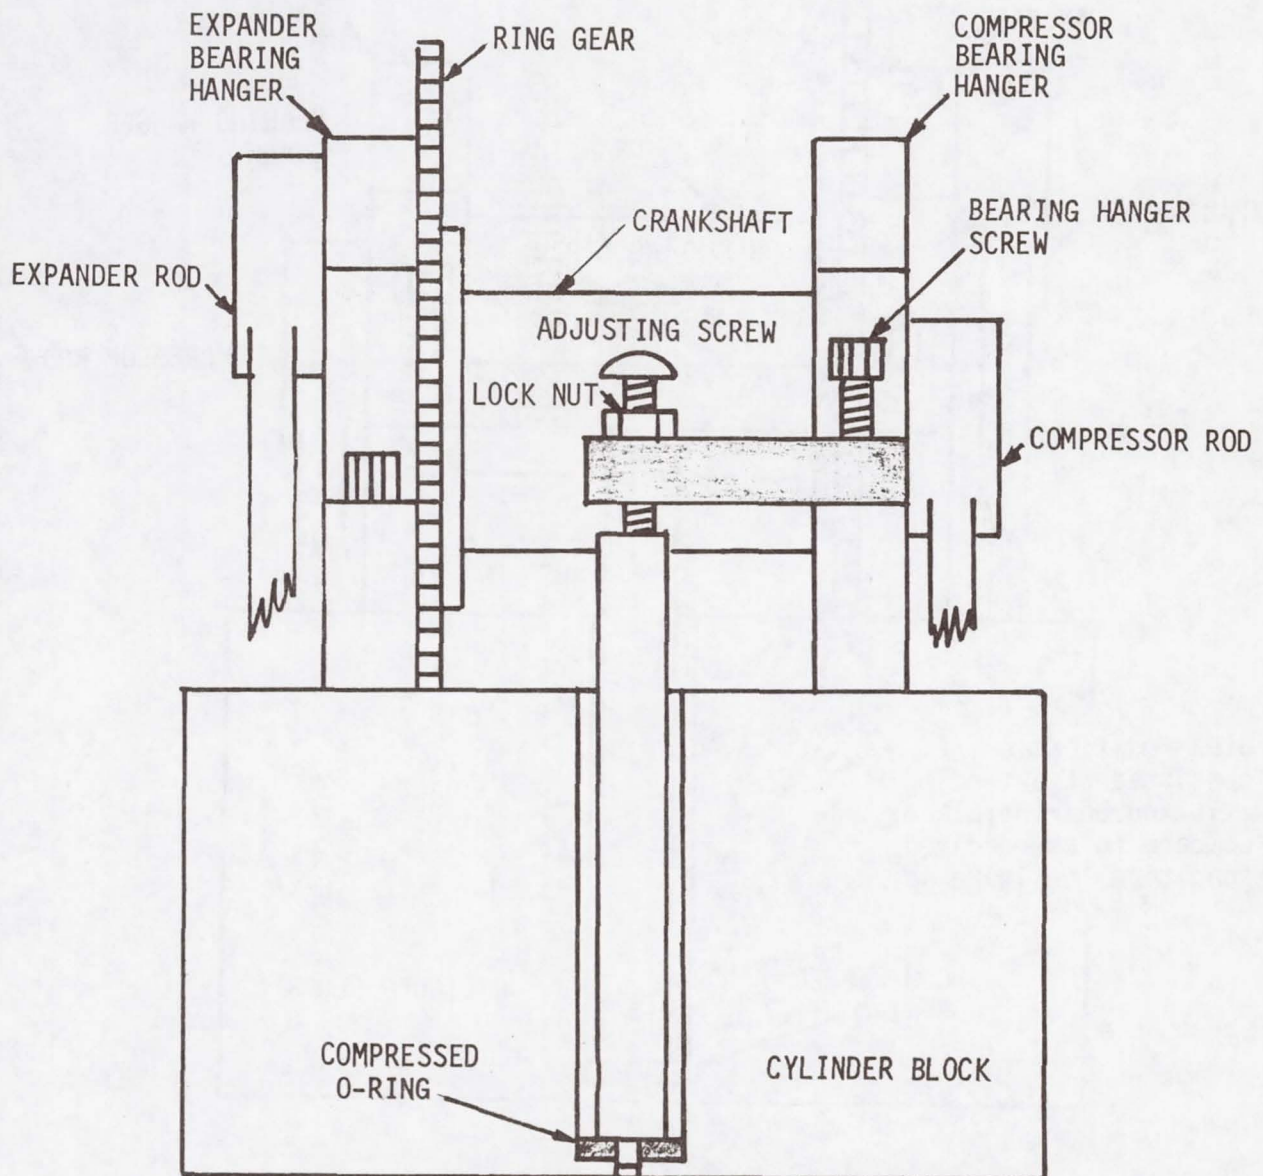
S192 Cooler Main Bearing Support (As Received)
